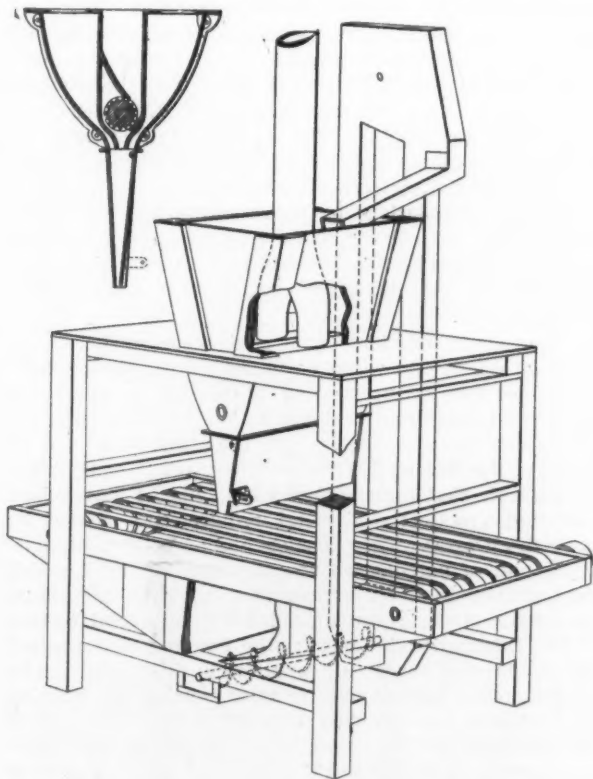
Sketch of the Apparatus with the Slides Removed and Detail Section of the Nozzle.
